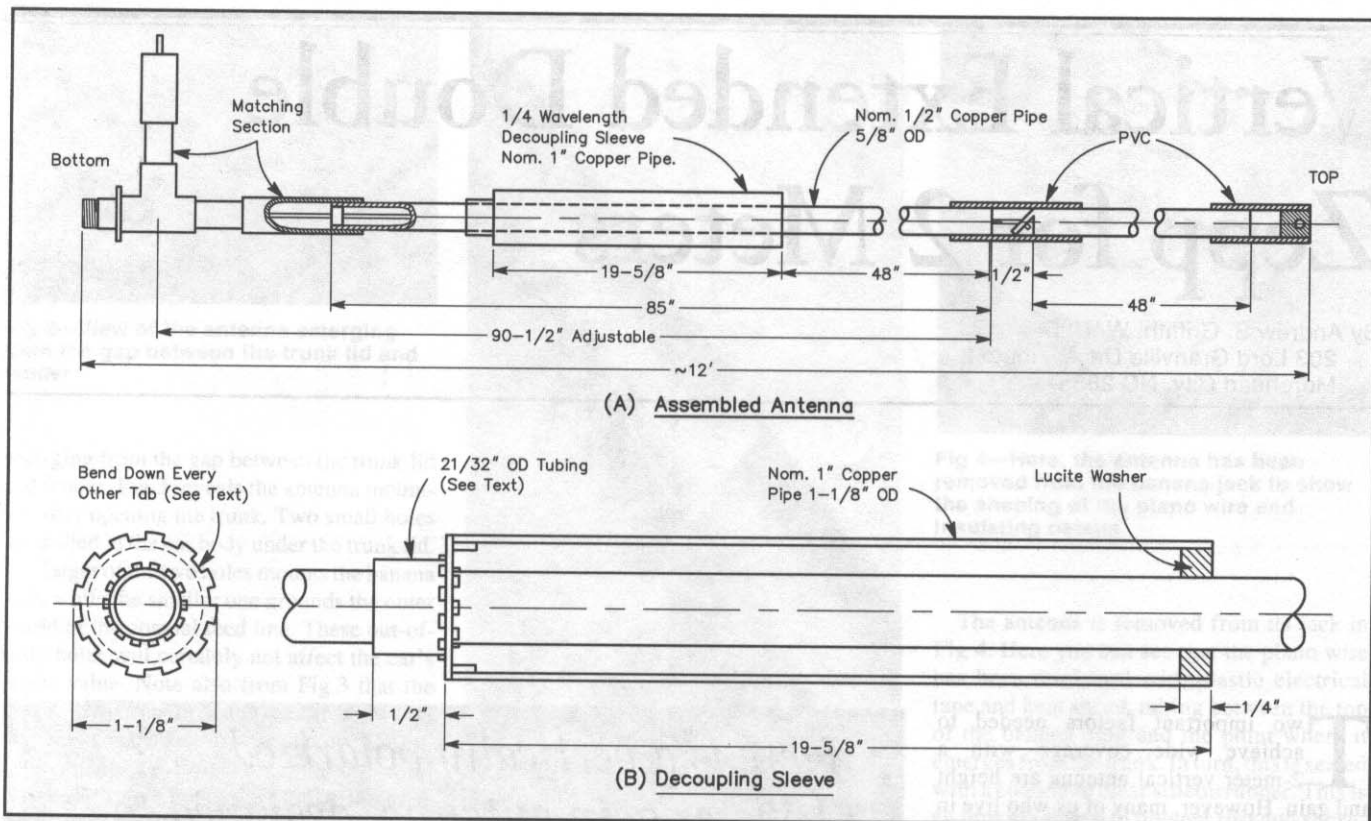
At A, drawing of W4ULD antenna. At B, details of decoupling sleeve.
